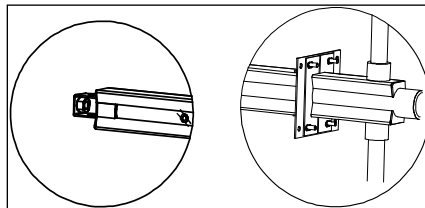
End Mounting Bracket and Escutcheon Plate
